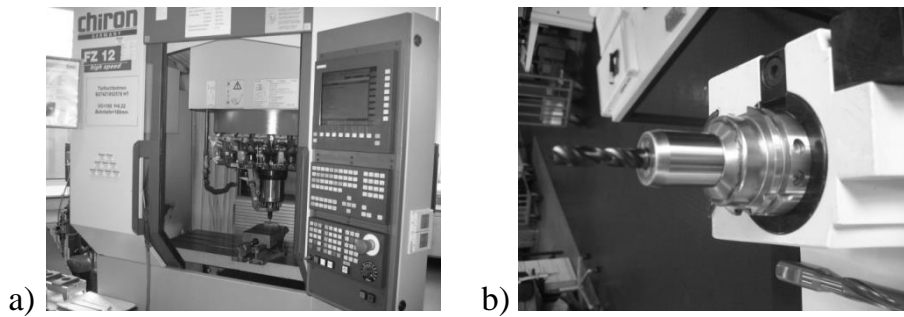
a) Machining equipment Chiron FZ12, CNC, b) Clamping fixture, high-precision hydraulic clamping head with the cutting tool
